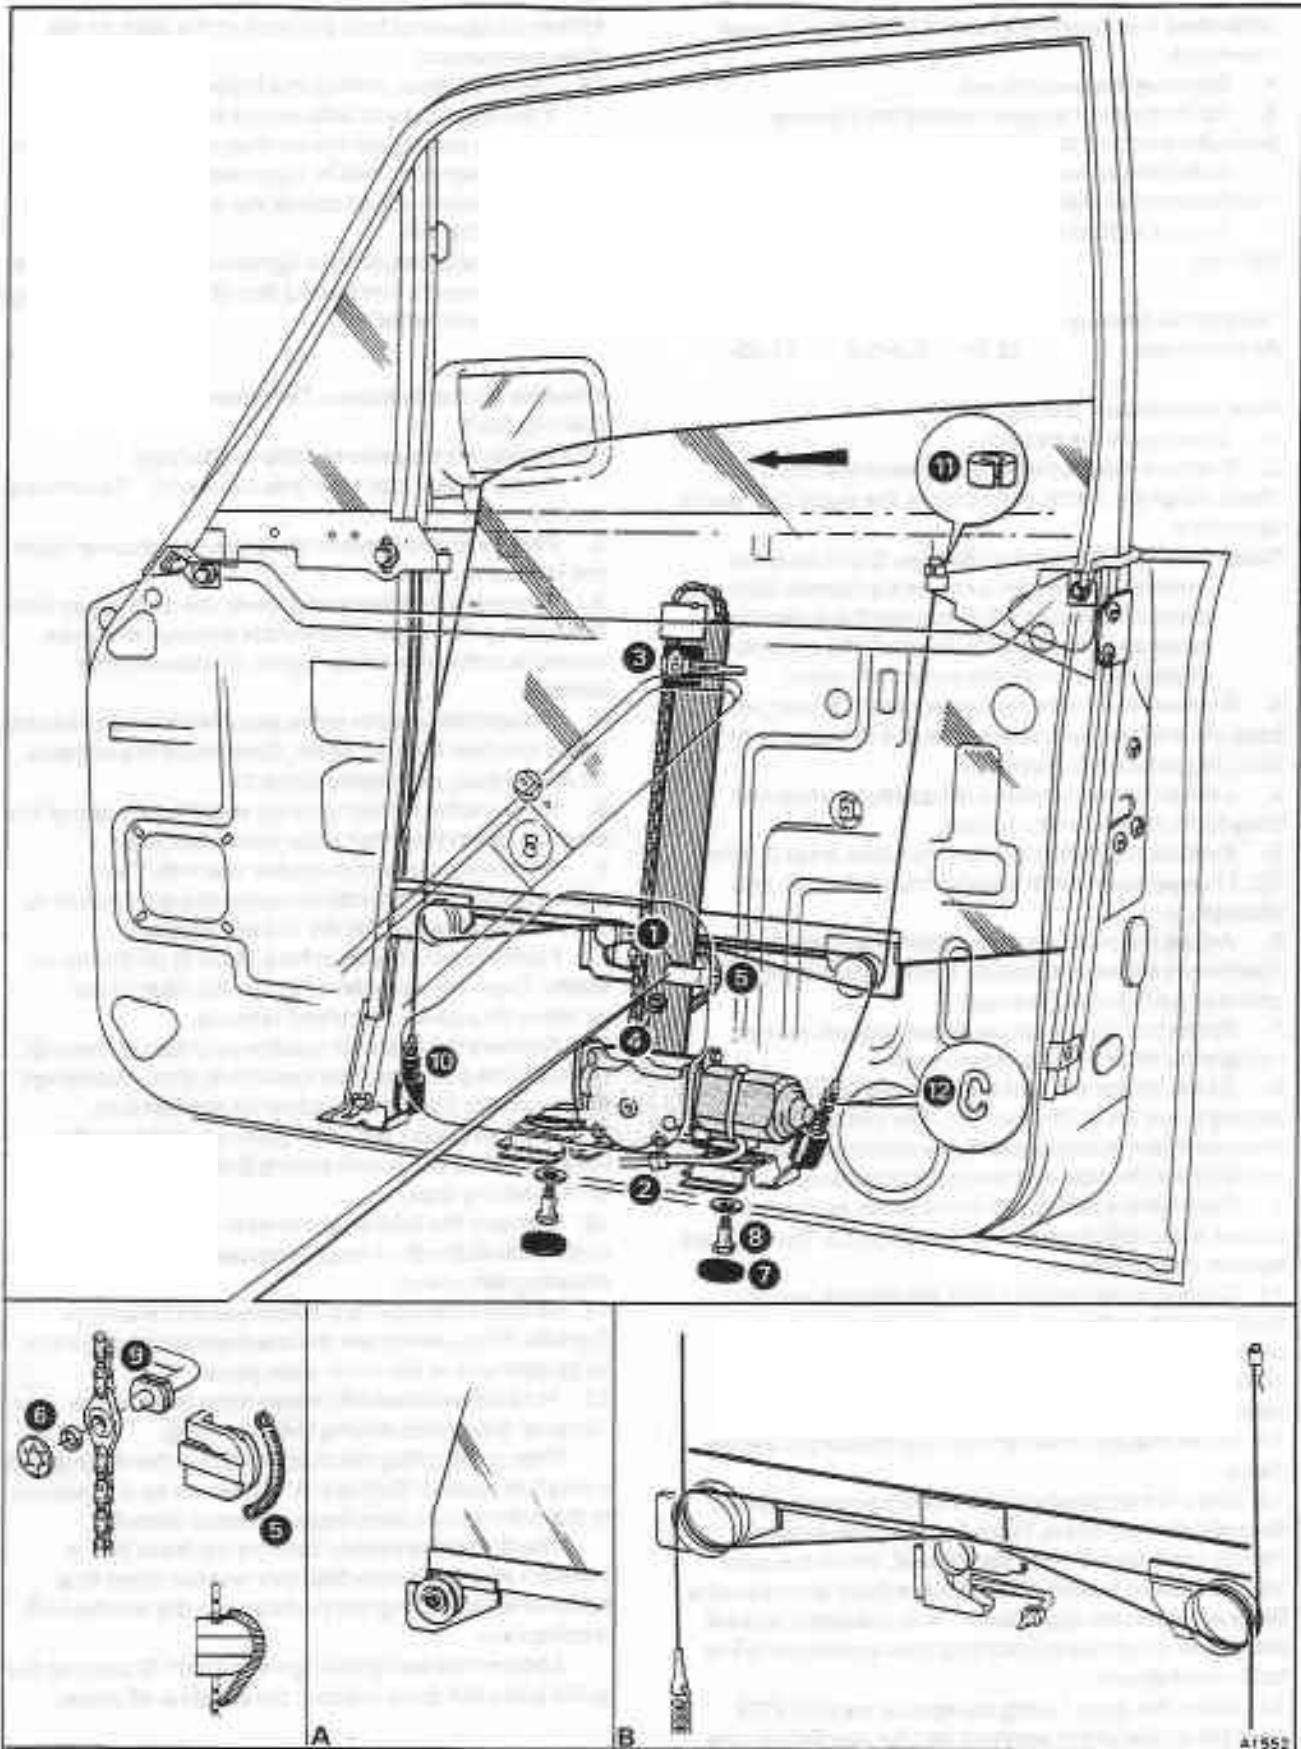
Window lift mechanism, door glass, and wire guidance assembly and fittings
